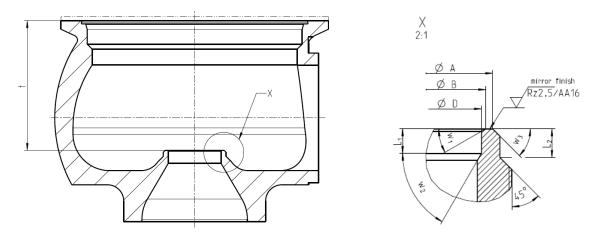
Nozzle, 483/484/485 HyTight assembly, soft sealing
